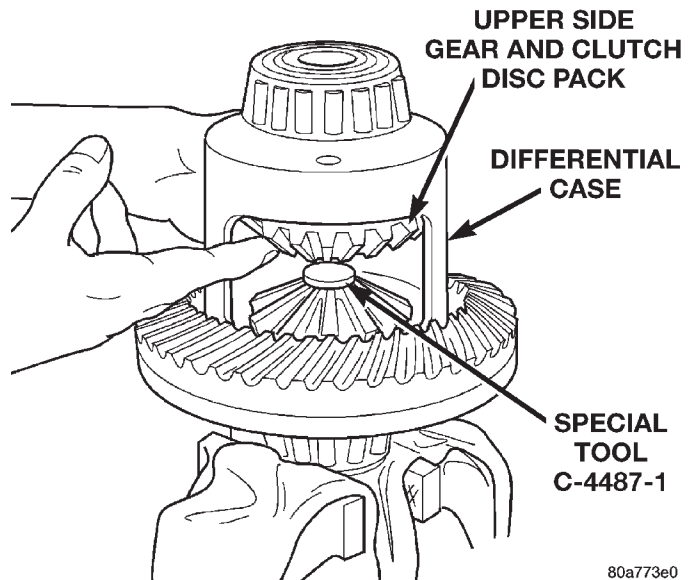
Upper Side Gear & Clutch Disc Pack Installation
